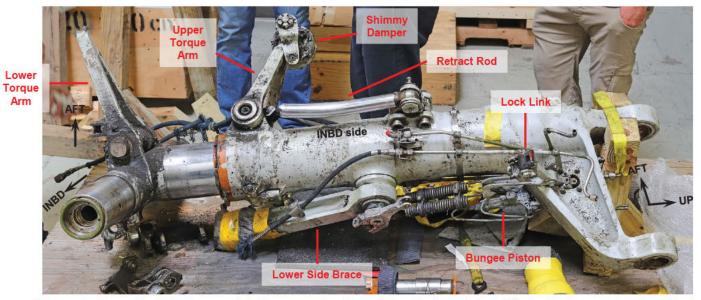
Overall of MLG assembly in as-received condition [axle rotated 45° clockwise relative to cylinder]
